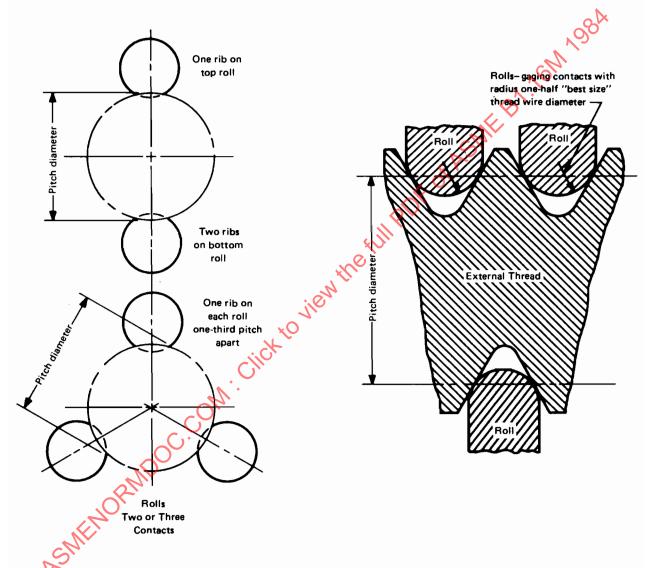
INDICATING THREAD GAGES — MINIMUM-MATERIAL THREAD GROOVE DIAMETER LIMIT AND SIZE
